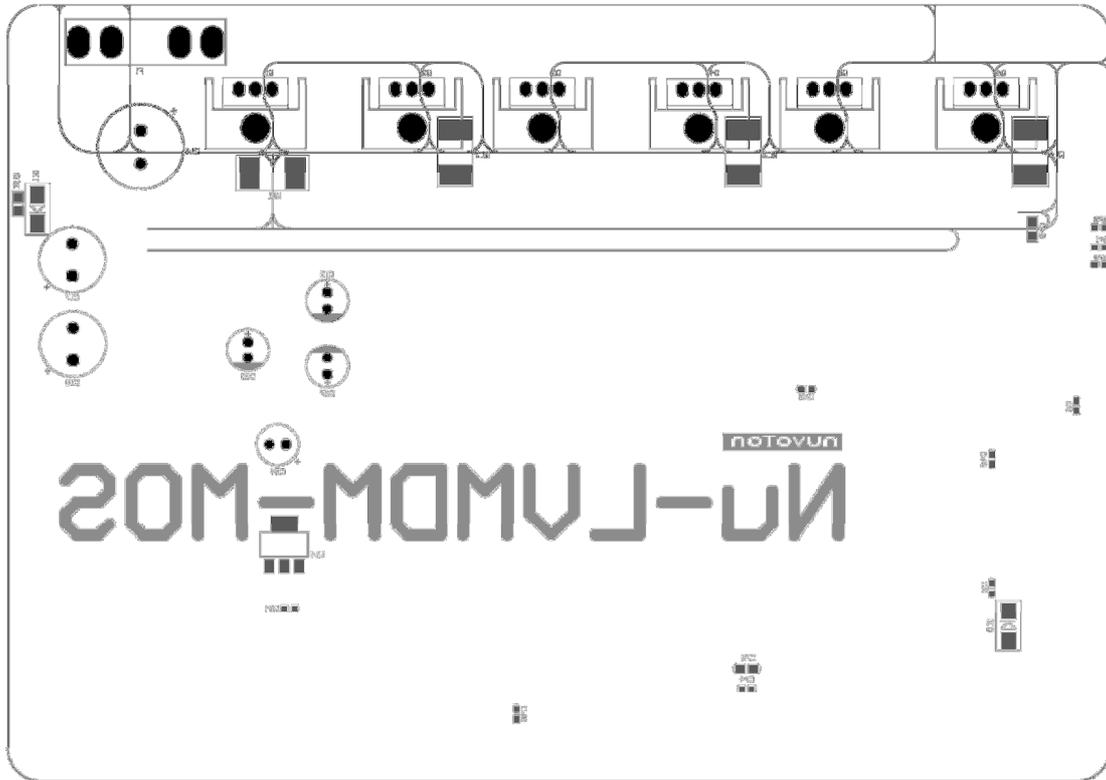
Nu-LVMDM-MOS Development Board Bottom Layout
